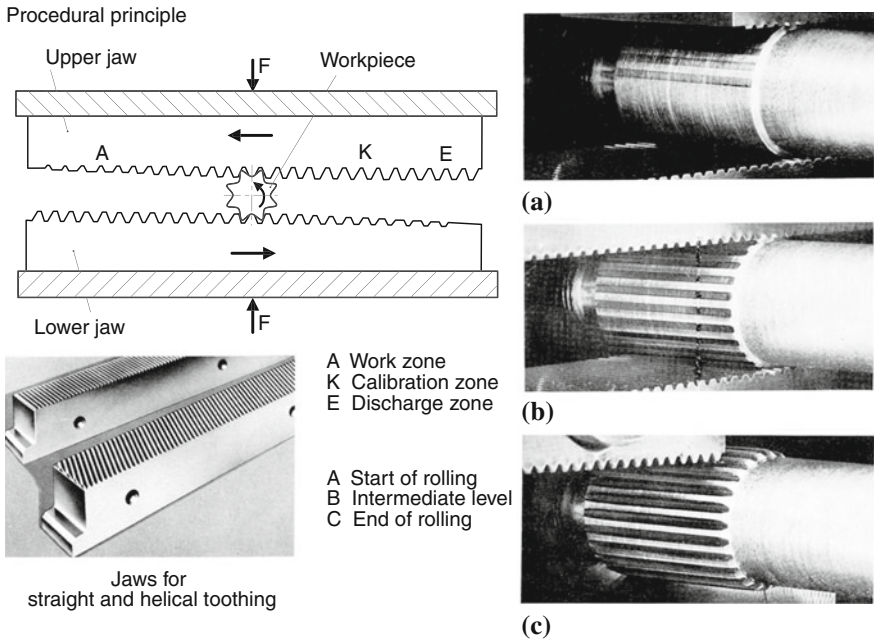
Cold rolling of toothings according to the Roto-Flo method
